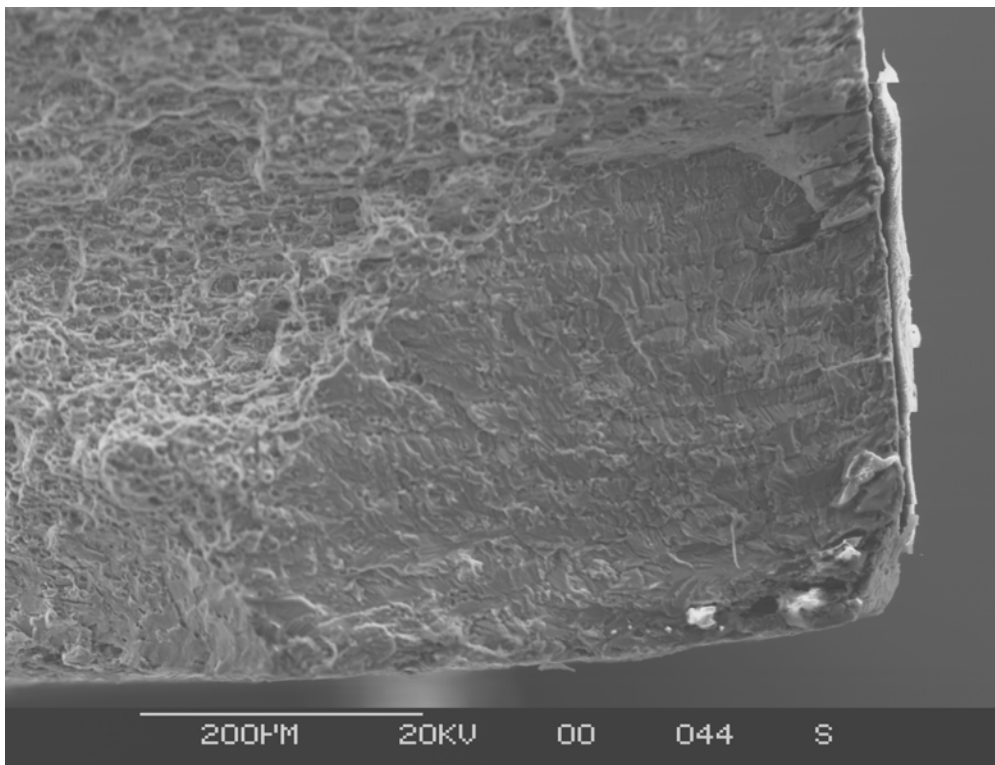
Fourth Fatigue Crack on Specimen 5878 at the Lower Right Corner of the Specimen Oriented as in Fig. B-39.
